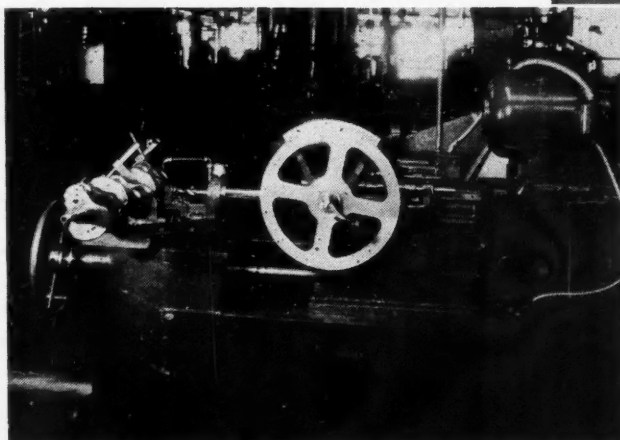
(Left) One of the IHC crank balance drilling machines fitted with the S. F. & John Barnes hydraulic ram units. Note larger vernier in the center
